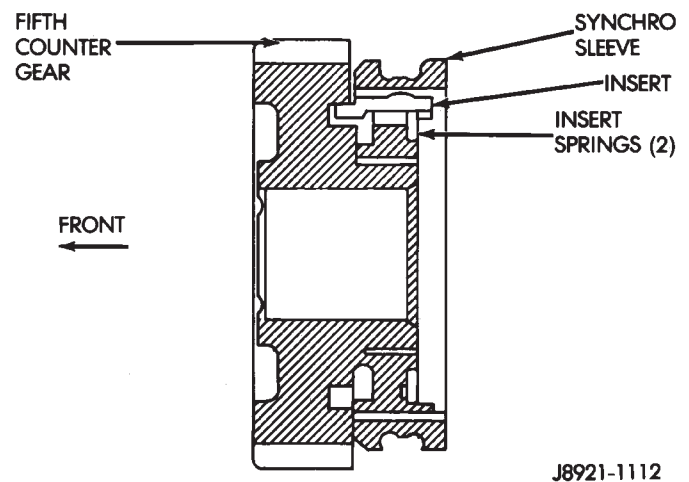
Assembling Fifth Gear And Synchro Assembly
